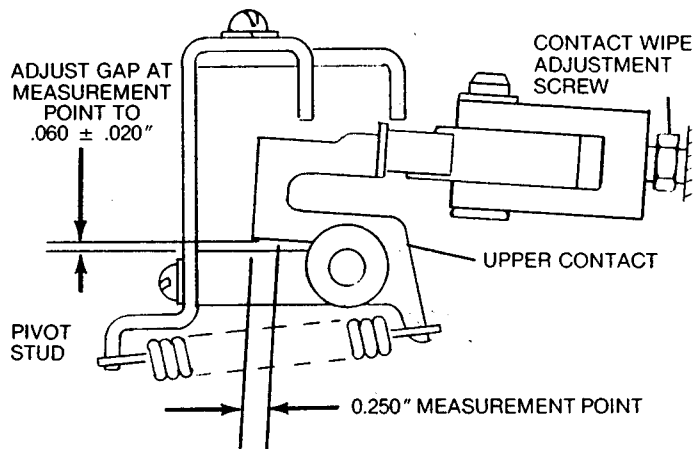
WIPE ADJUSTMENT 800 AMP
